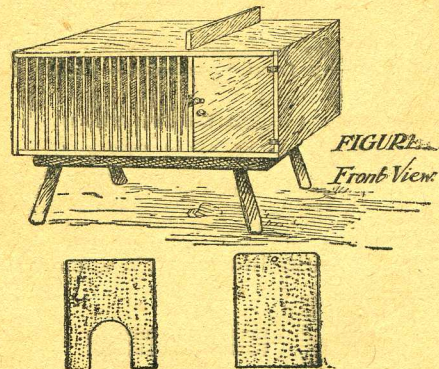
(End View of Partition) Fig. 3 (Sliding Door)
